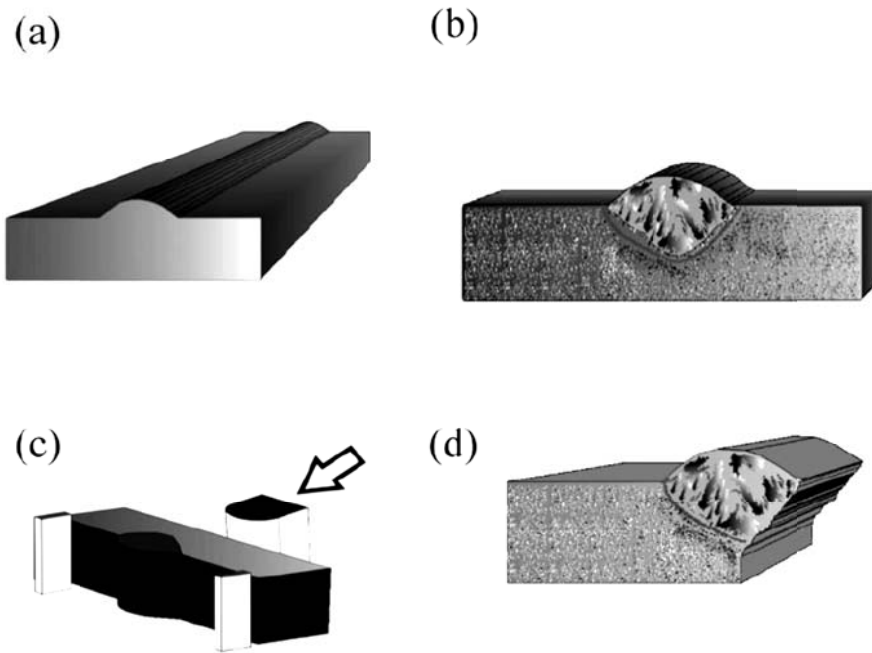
Schematic description of the test: a) Bead on plate weld specimen. b) Slicing the specimen into sub-specimens. c) Hitting with a pendulum. d) Light or electron microscopy of the fracture surface [12] (Originally published in Steel Research International, 77 (2006), No. 12, pages 889-895. With permission.)
